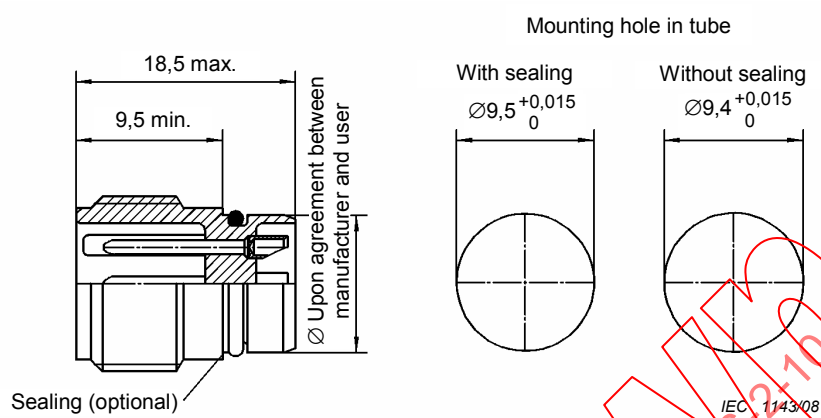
Tube insert, male contacts, mounting with thread M12 × 1
